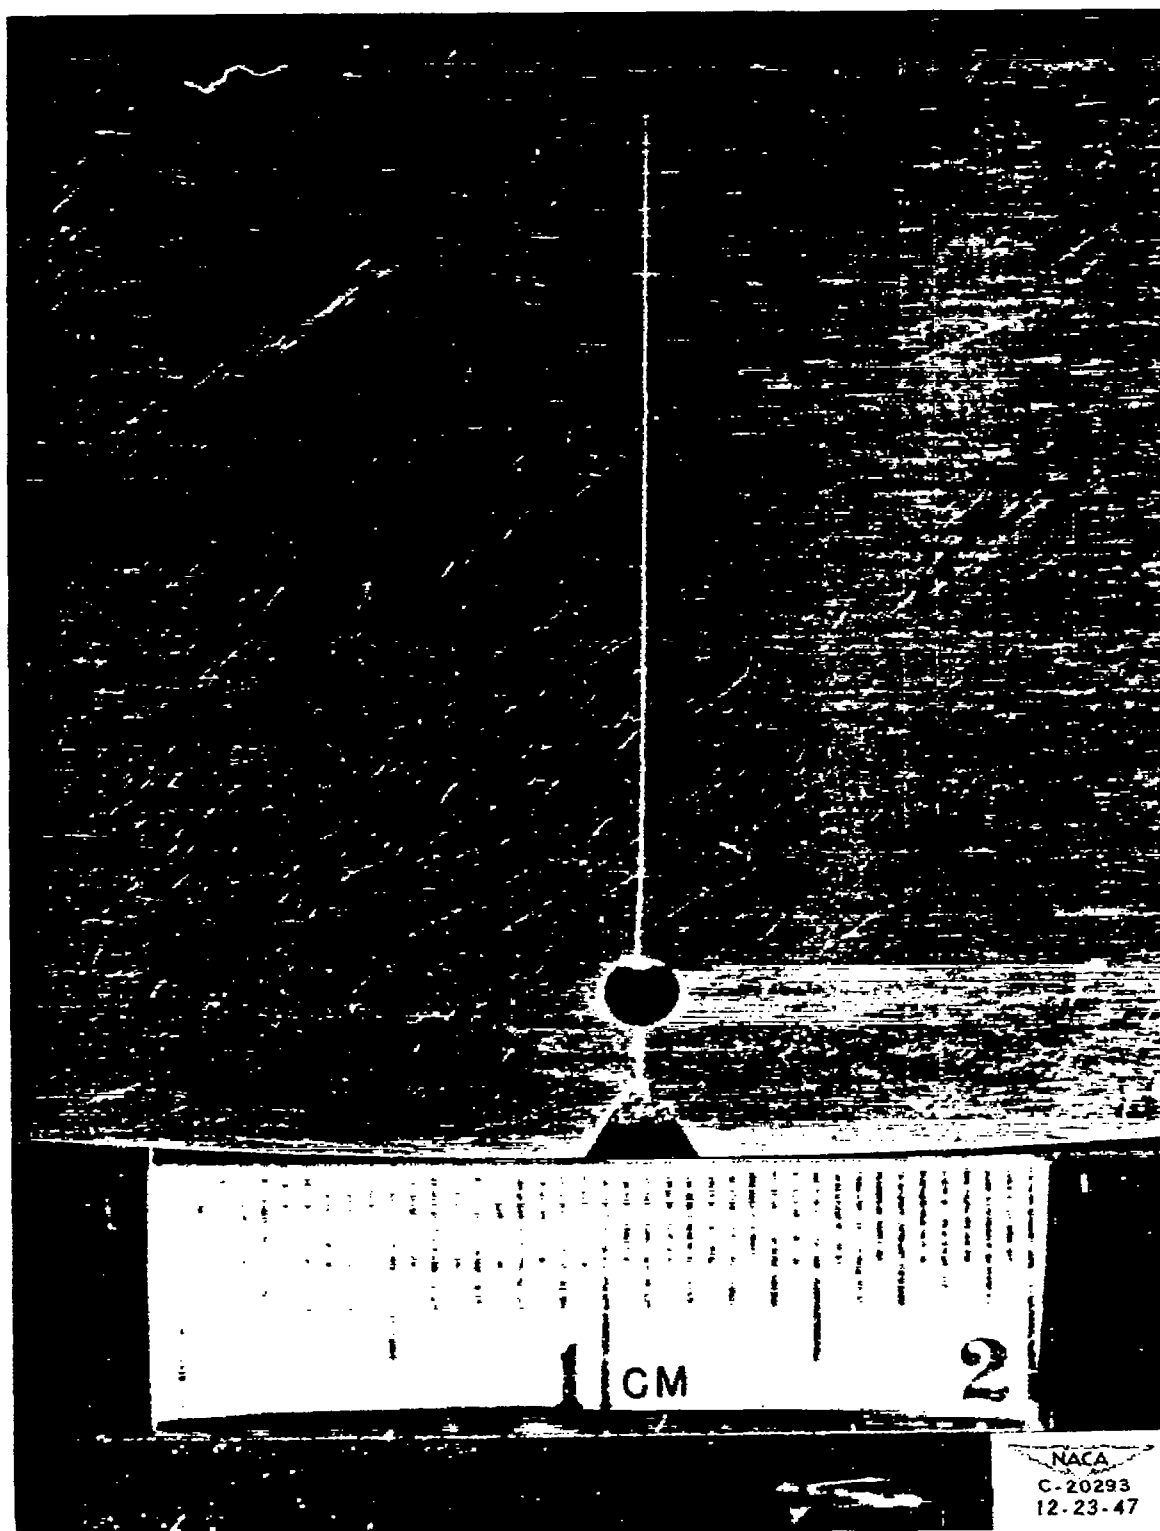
Radial crack in 13.5-inch-diameter tool-steel disk. Hardness, Rockwell C-60.
